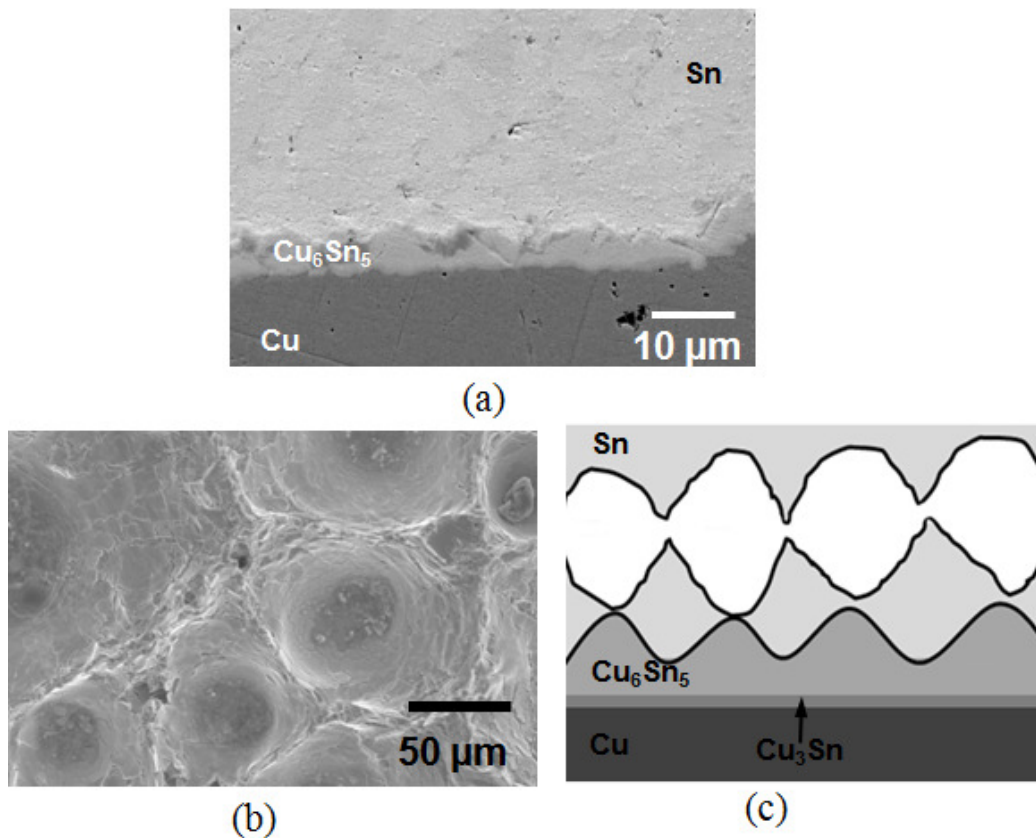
(a) Cross-section of untested joint; (b) Voids nucleated at tips of Cu_6Sn_5 nodules (top view); (c) Schematic side view of fracture mechanism. (Courtesy of K. Yazzie and N. Chawla)
